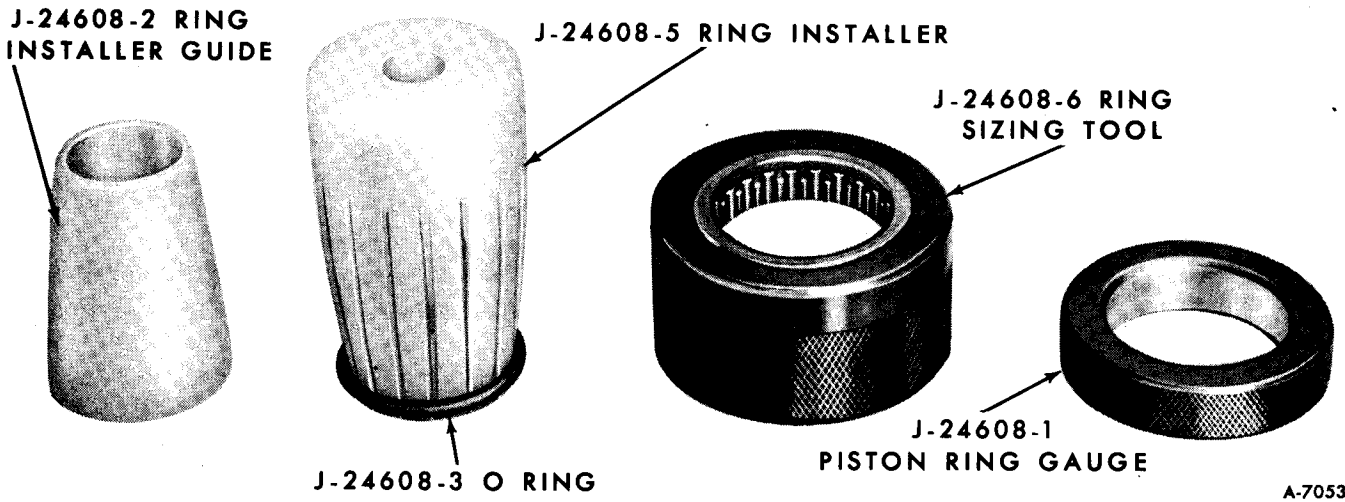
Teflon Piston Ring Installing, Sizing and Gauging Tools
